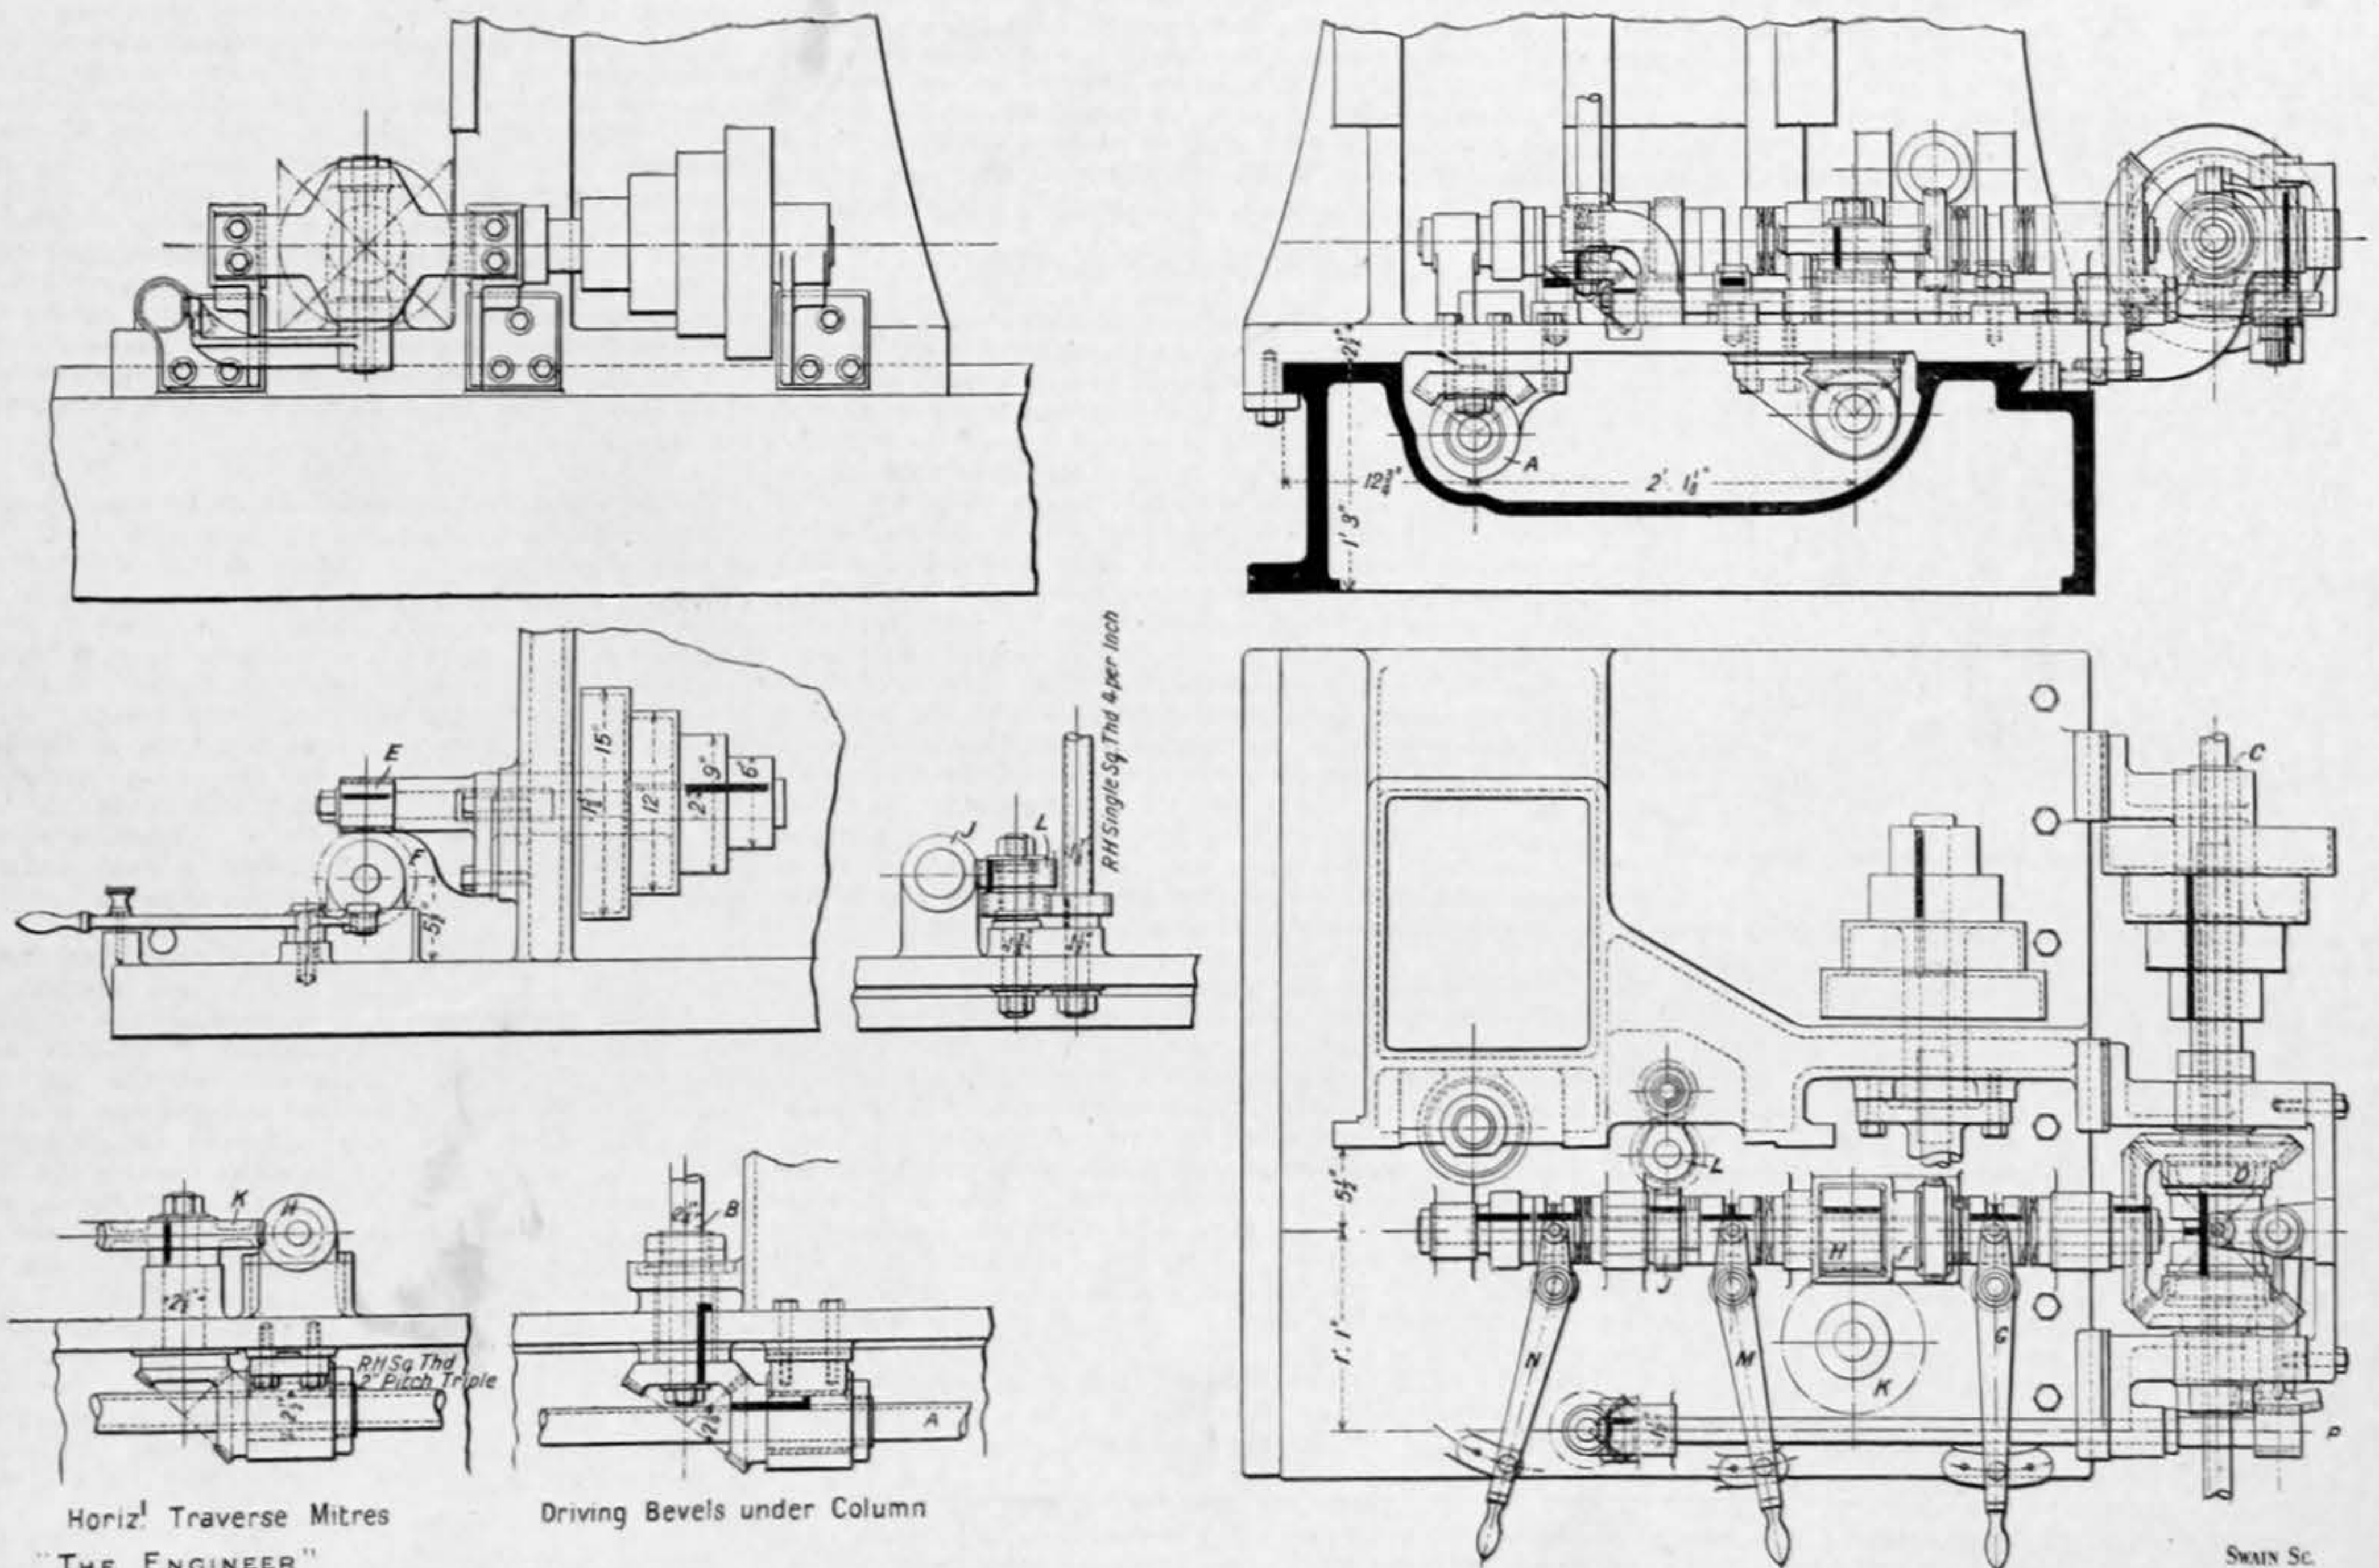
GENERAL ARRANGEMENT OF THE FEED MECHANISM
